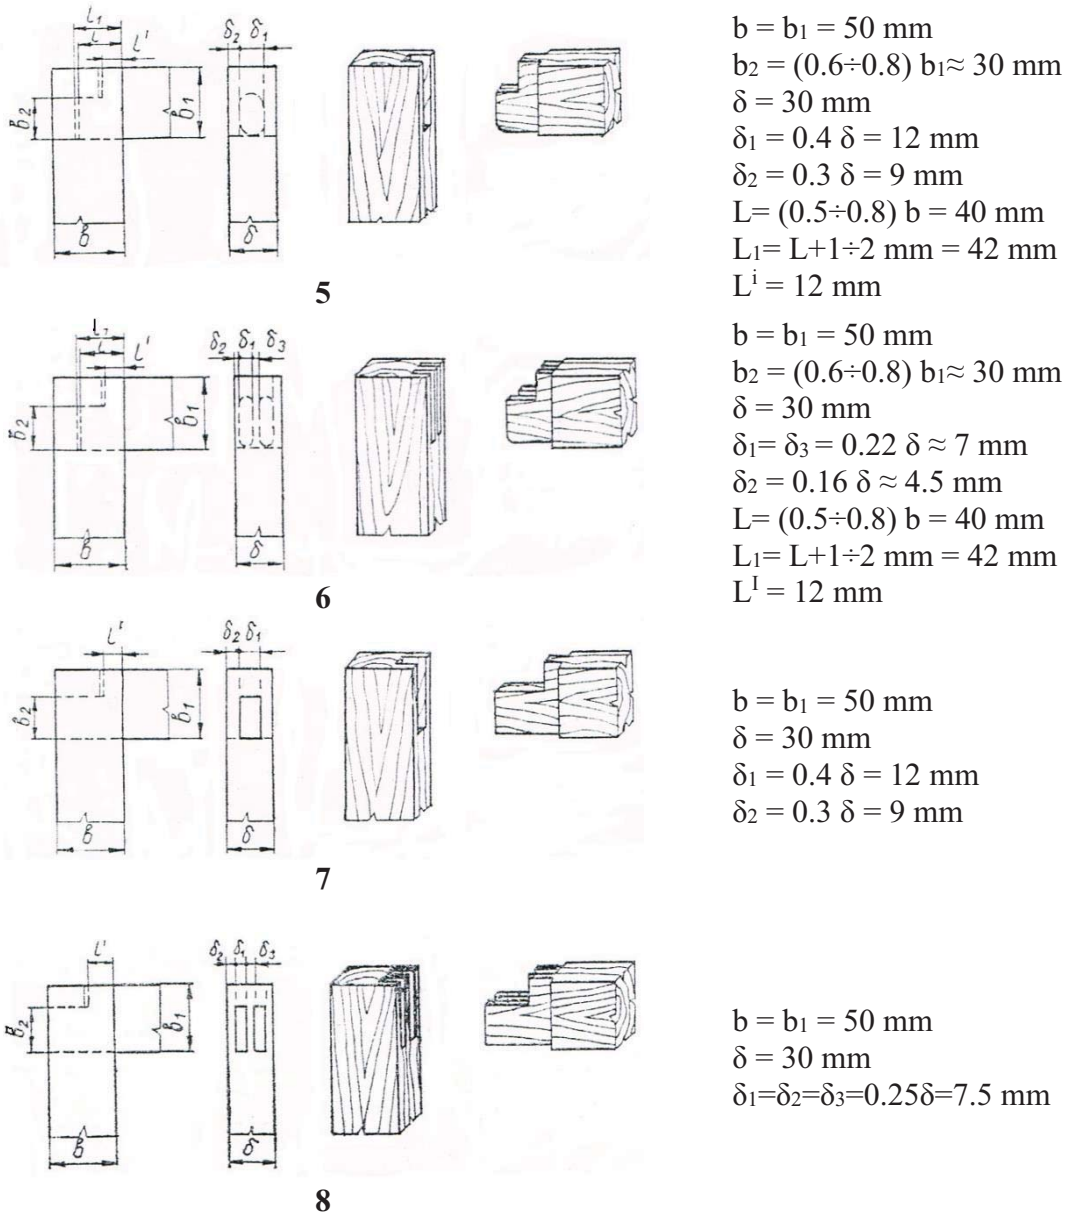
End corner haunched mortise and tenon joints: 5 – haunched blind mortise and tenon joint; 6 – haunched blind twin mortise and tenon joint; 7 – haunched through mortise and tenon joint; 8 – haunched through twin mortise and tenon joint.
